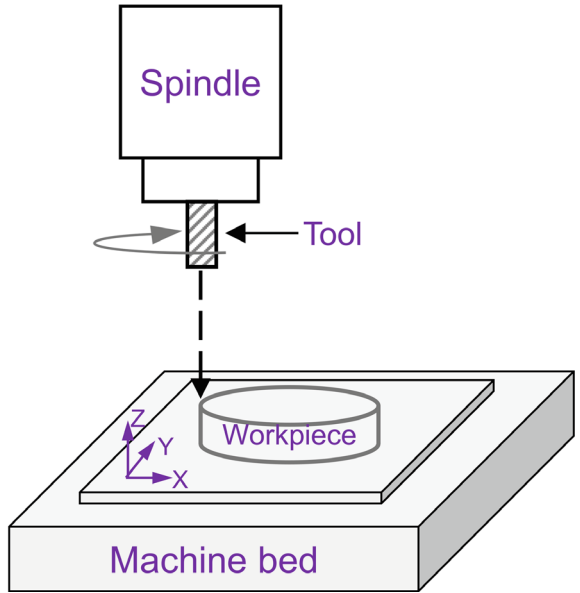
Schematic diagram of workpiece and tool arrangement in milling tests
